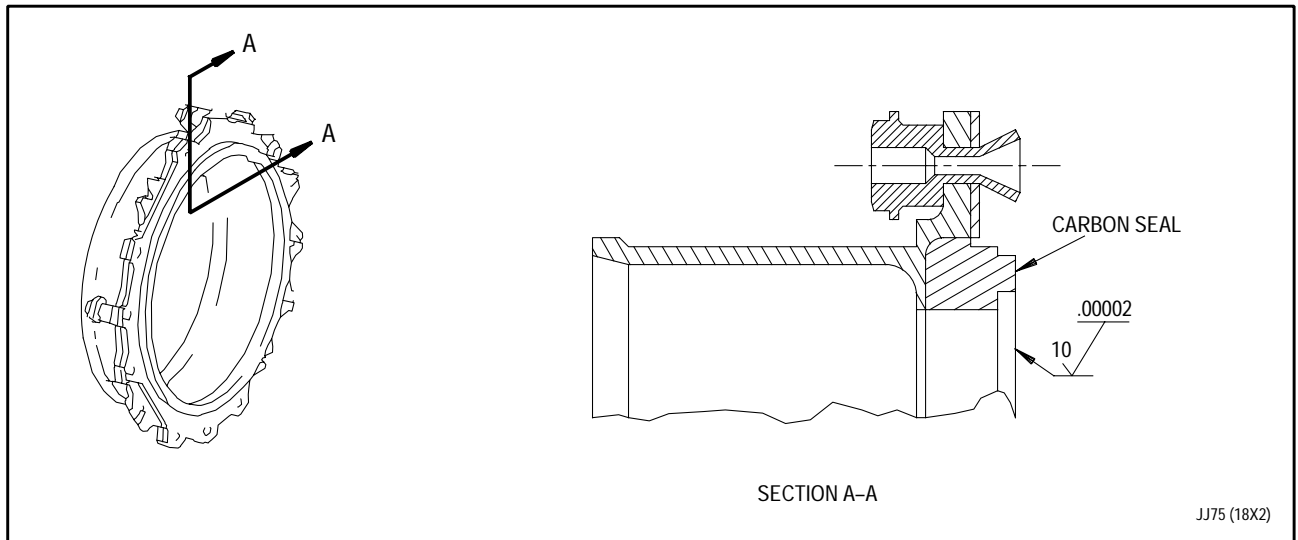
No. 5 Bearing Face Seal Assembly - Carbon Seal Element Lap Repair
